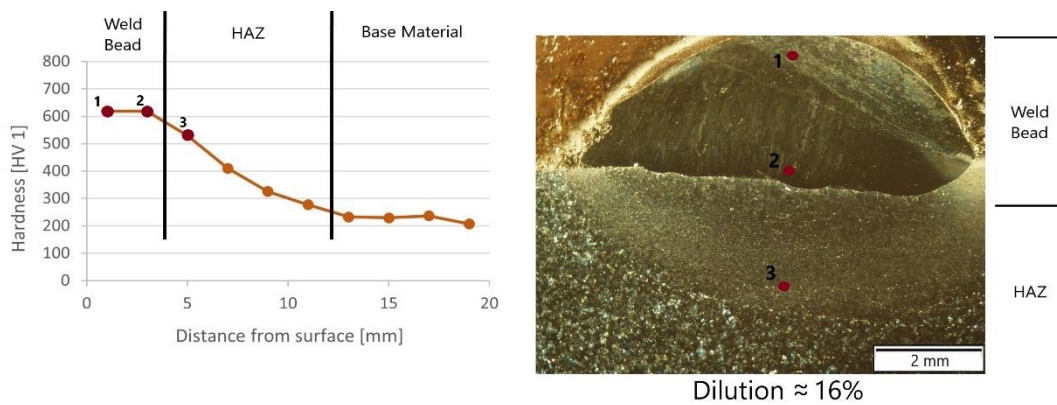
Welding Current: 110A; Welding Speed: 200mm/min; Powder Feed Rate: 20g/min (50)
